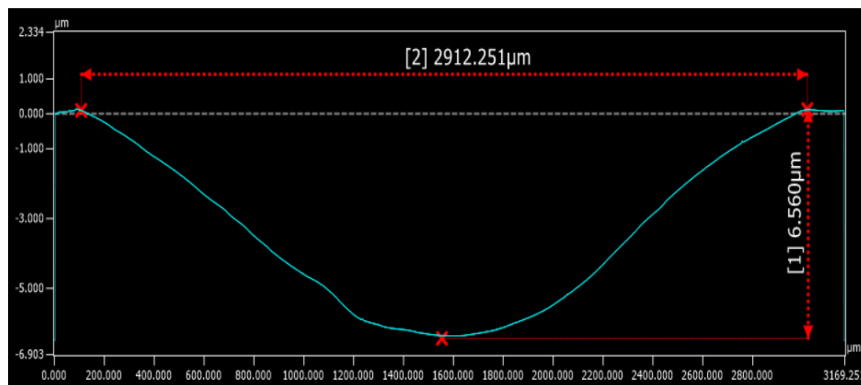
Image showing 2D cross section of surface polished using spiral toolpath.
